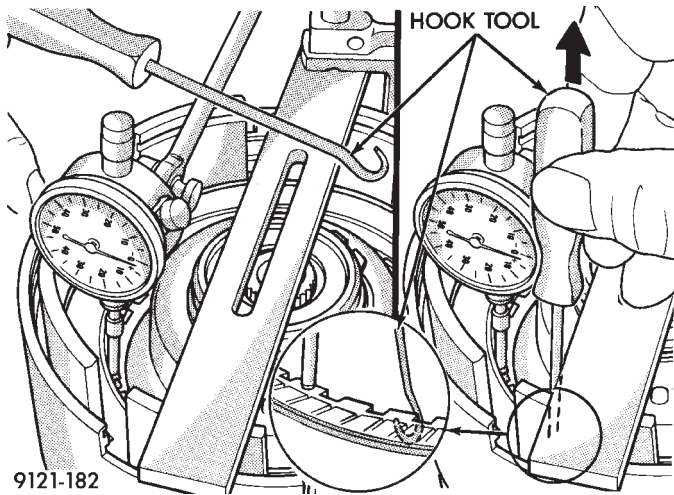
Set Up Dial Indicator for Clutch Clearance
